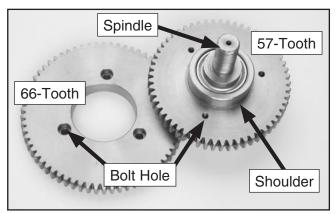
Center spindle, 57-tooth gear, and 66-tooth gear.
